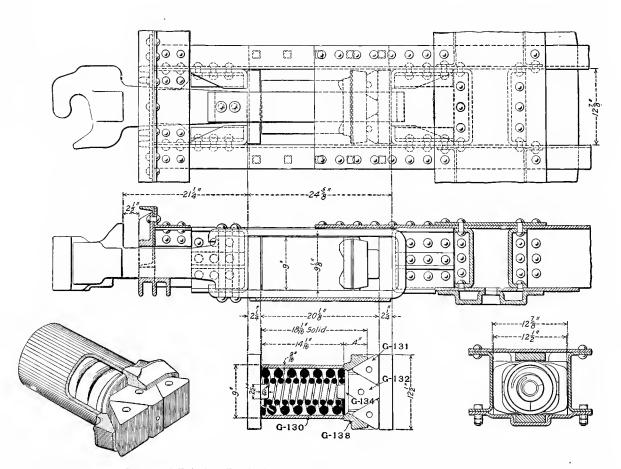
Sessions-Standard Friction Draft Gear, Type K, for Freight Cars. Standard Coupler Company.
